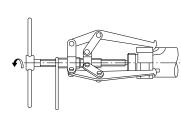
Removal of Inner Ring Using Withdrawal Tool (2)
